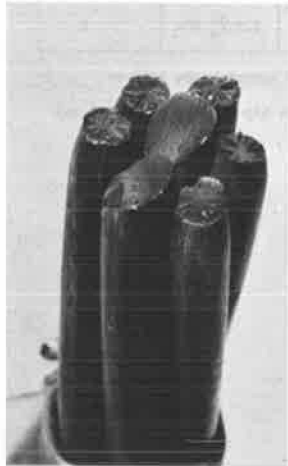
Fatigue and tension fracture surfaces of strands.
